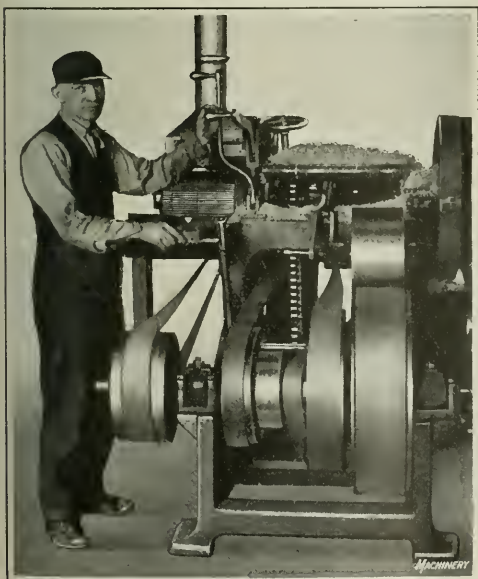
Reclaimed Belting in Use on a Woodworking Machine
